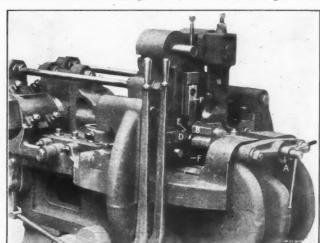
View of Hammer Header showing Left-hand Die Hanger removed, and One Gripping Die in Place
